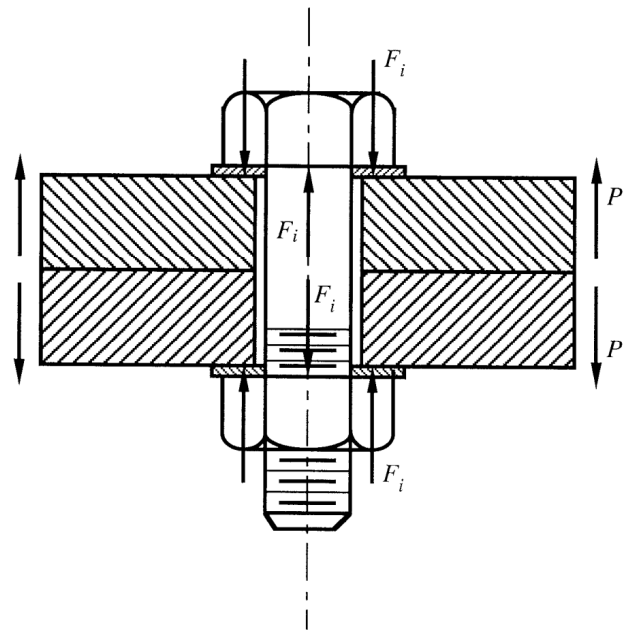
Forces Acting upon a Bolted Preloaded Connection
